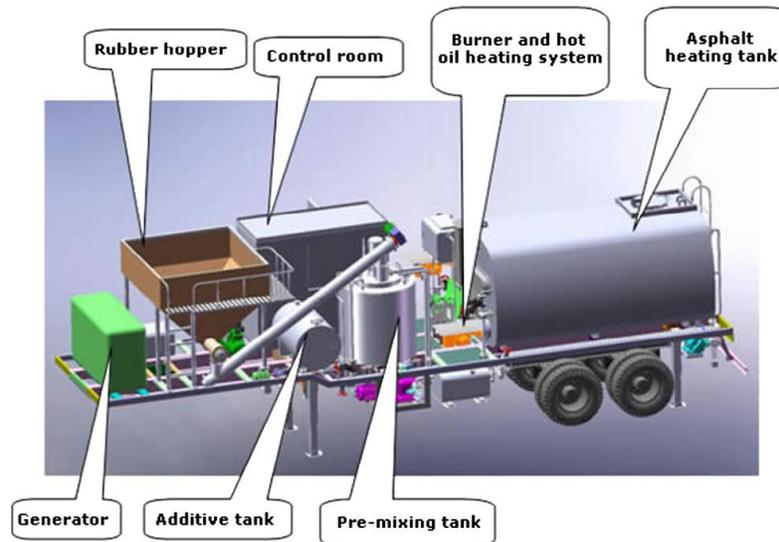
A Typical On-Site Blending System for Rubberized Binder (28)
